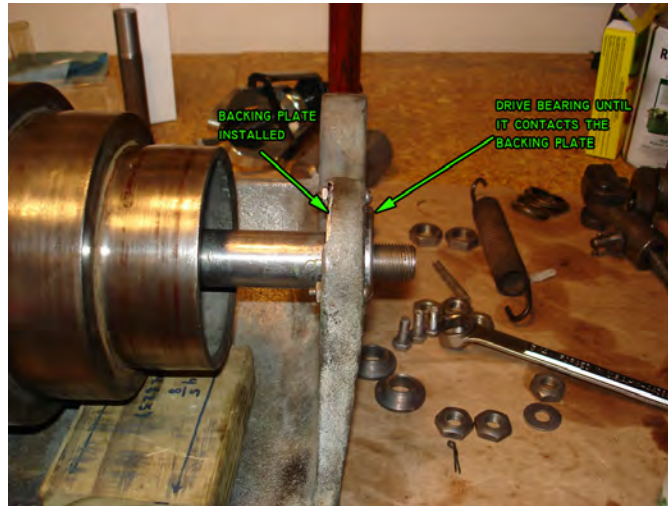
Finishing the process of pressing on the right side bearing for the countershaft.
